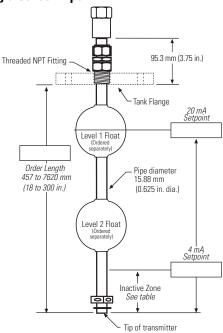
Rigid Sensor Pipe with Threaded NPT fitting
